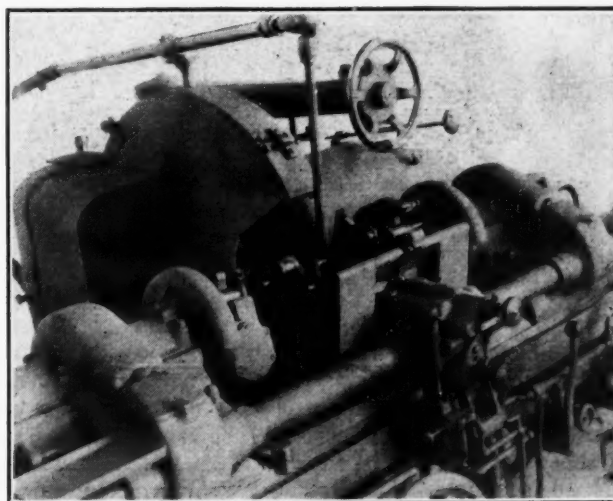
Left hand view of the stationary hydraulic work rest in forward position supporting crankshaft in the grinding position, and Arnold gage on pin being ground
